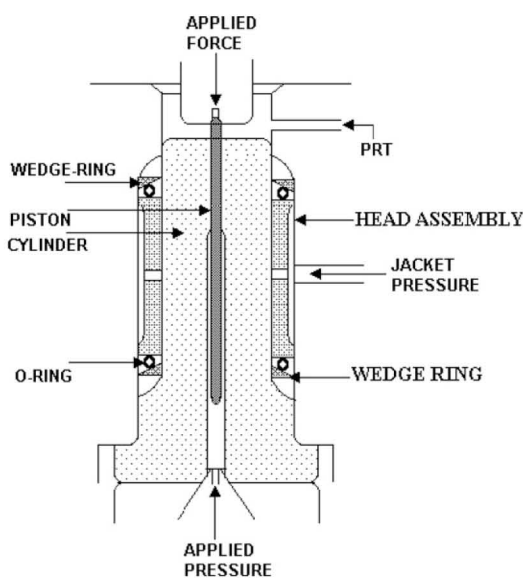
Schematic diagram of the piston–cylinder assembly.
